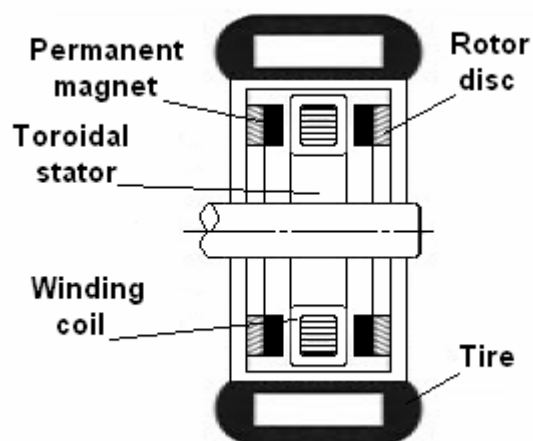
Cross-sectional view of a AFPM being used as wheel direct-drive motor.
